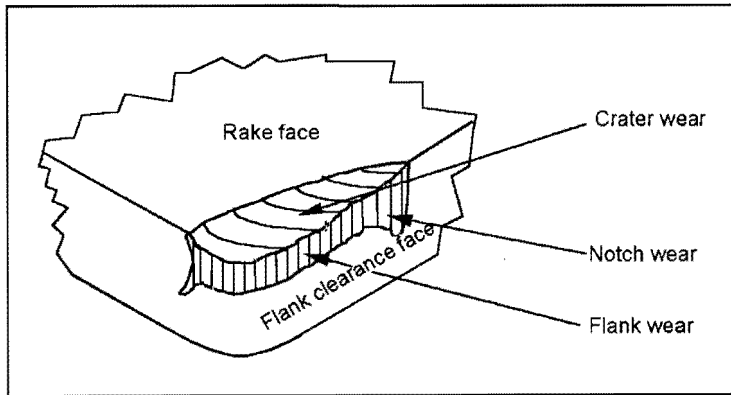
Typical wear features on a cutting tool insert (see fig. 5-1 for feed direction and the position of the chip) (Stachowiak and Stachowiak, 1994).
